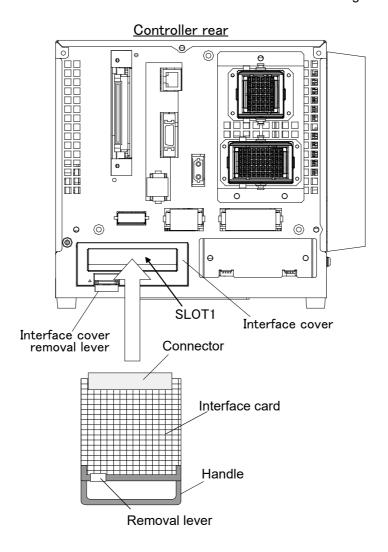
Mounting of the CC-Link interface card (CR1D controller)
